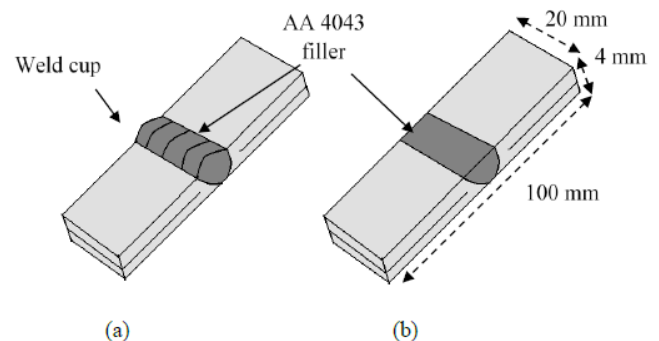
Schematic diagram of immersion test samples of the AA5754 plasma butt weld: (a) as received sample; (b) mechanically polished sample.
